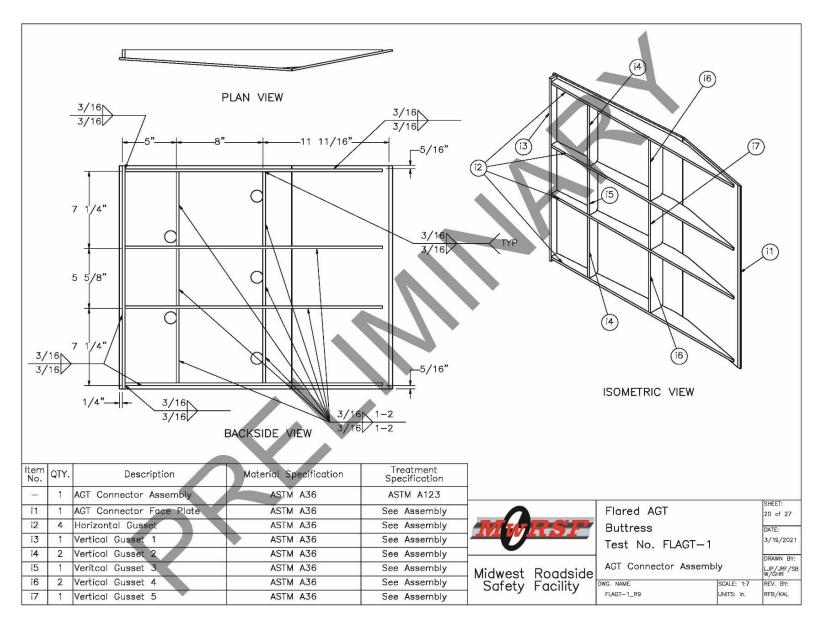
AGT Connector Plate Assembly, Test No. FLAGT-1
